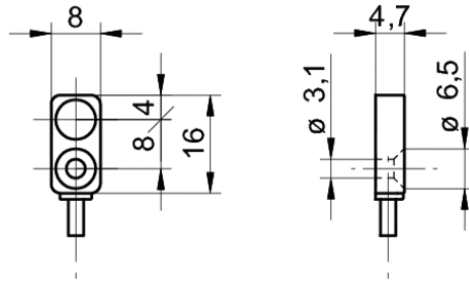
Baumer IWFm: inductive sensor dimension drawing.
